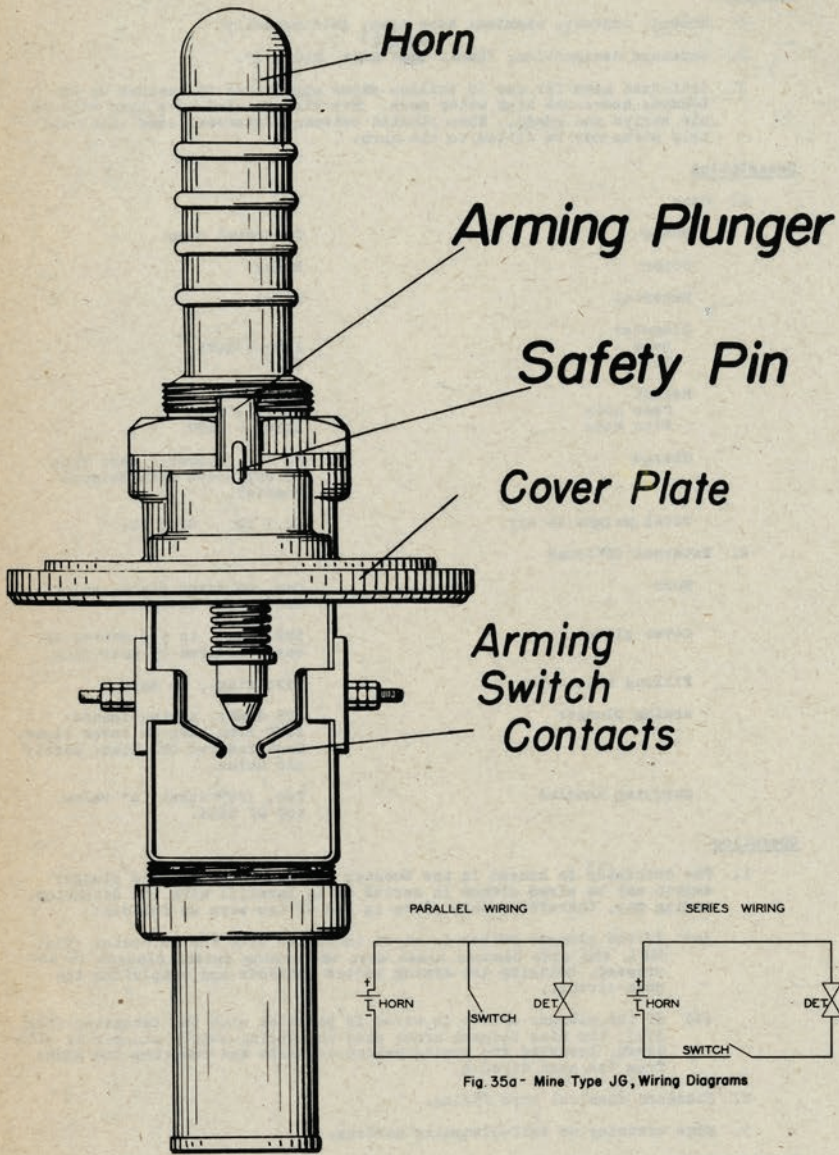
Arming Switch and Firing Assembly, Mine Type JG
